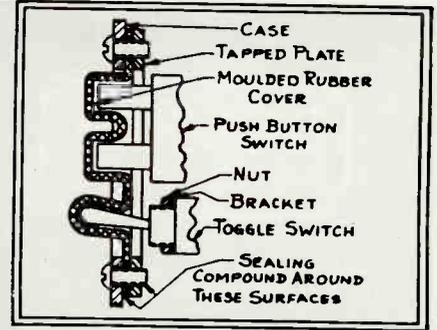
A molded rubber cover seals pushbuttons and toggle-switch handles
